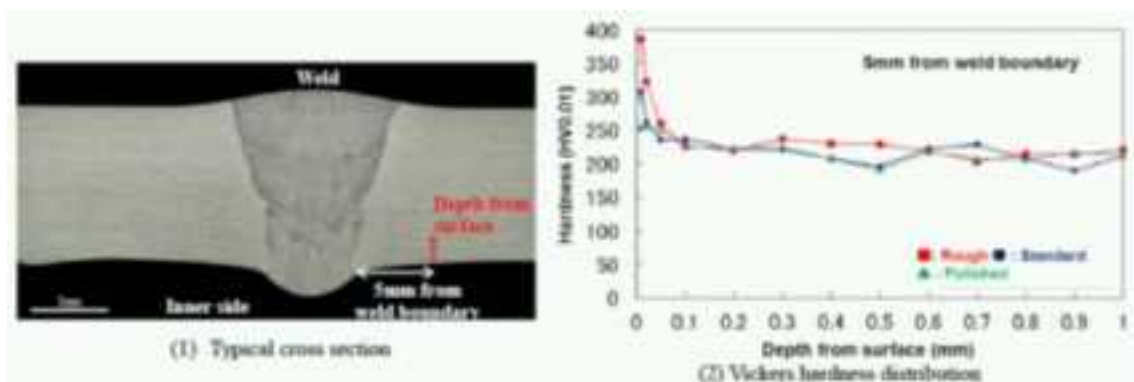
Typical cross section of weld and hardness distribution near machined surface
